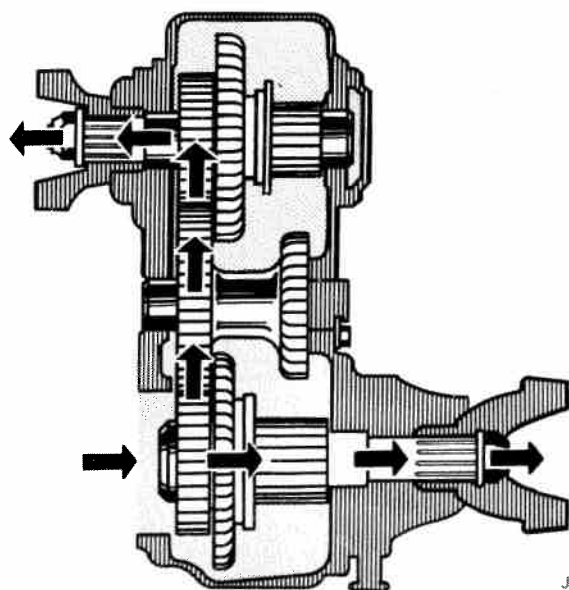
Silent Transfer Case in 2-Wheel Drive
